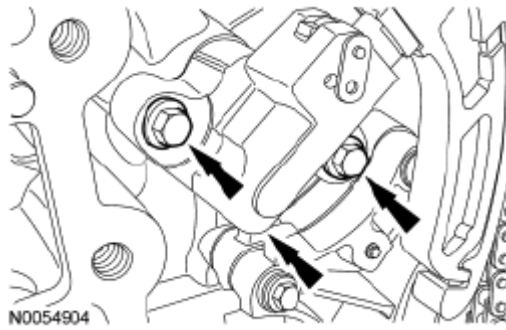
Locating Primary Timing Chain Tensioner Bolts
